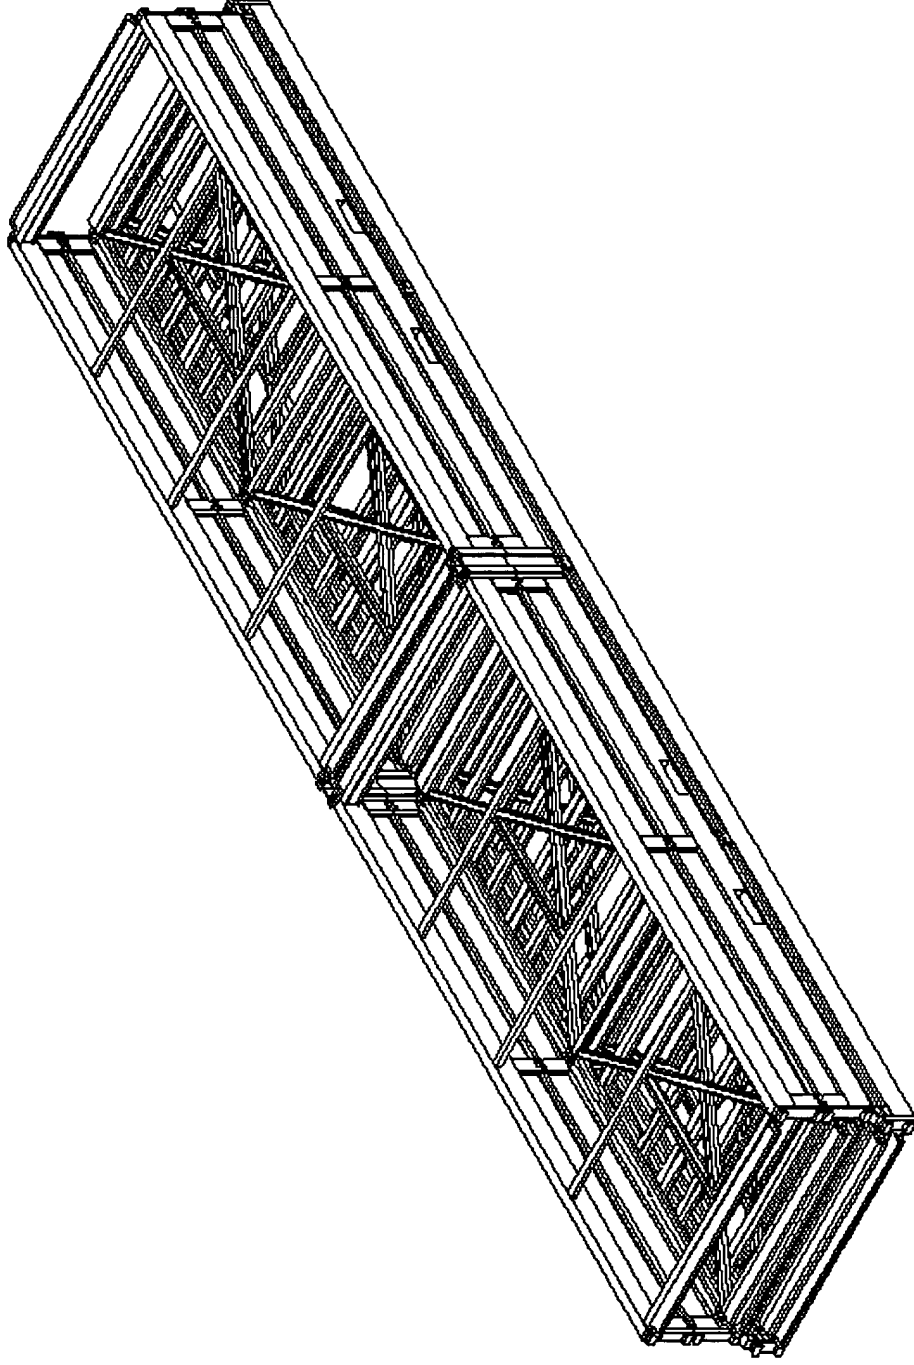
D: Step2 of disassemble and load process: The first "collapsible cargo container frame panel assembly" is stacked on top of the shipping frame panel (shown in FIG. 39A/C/D)
